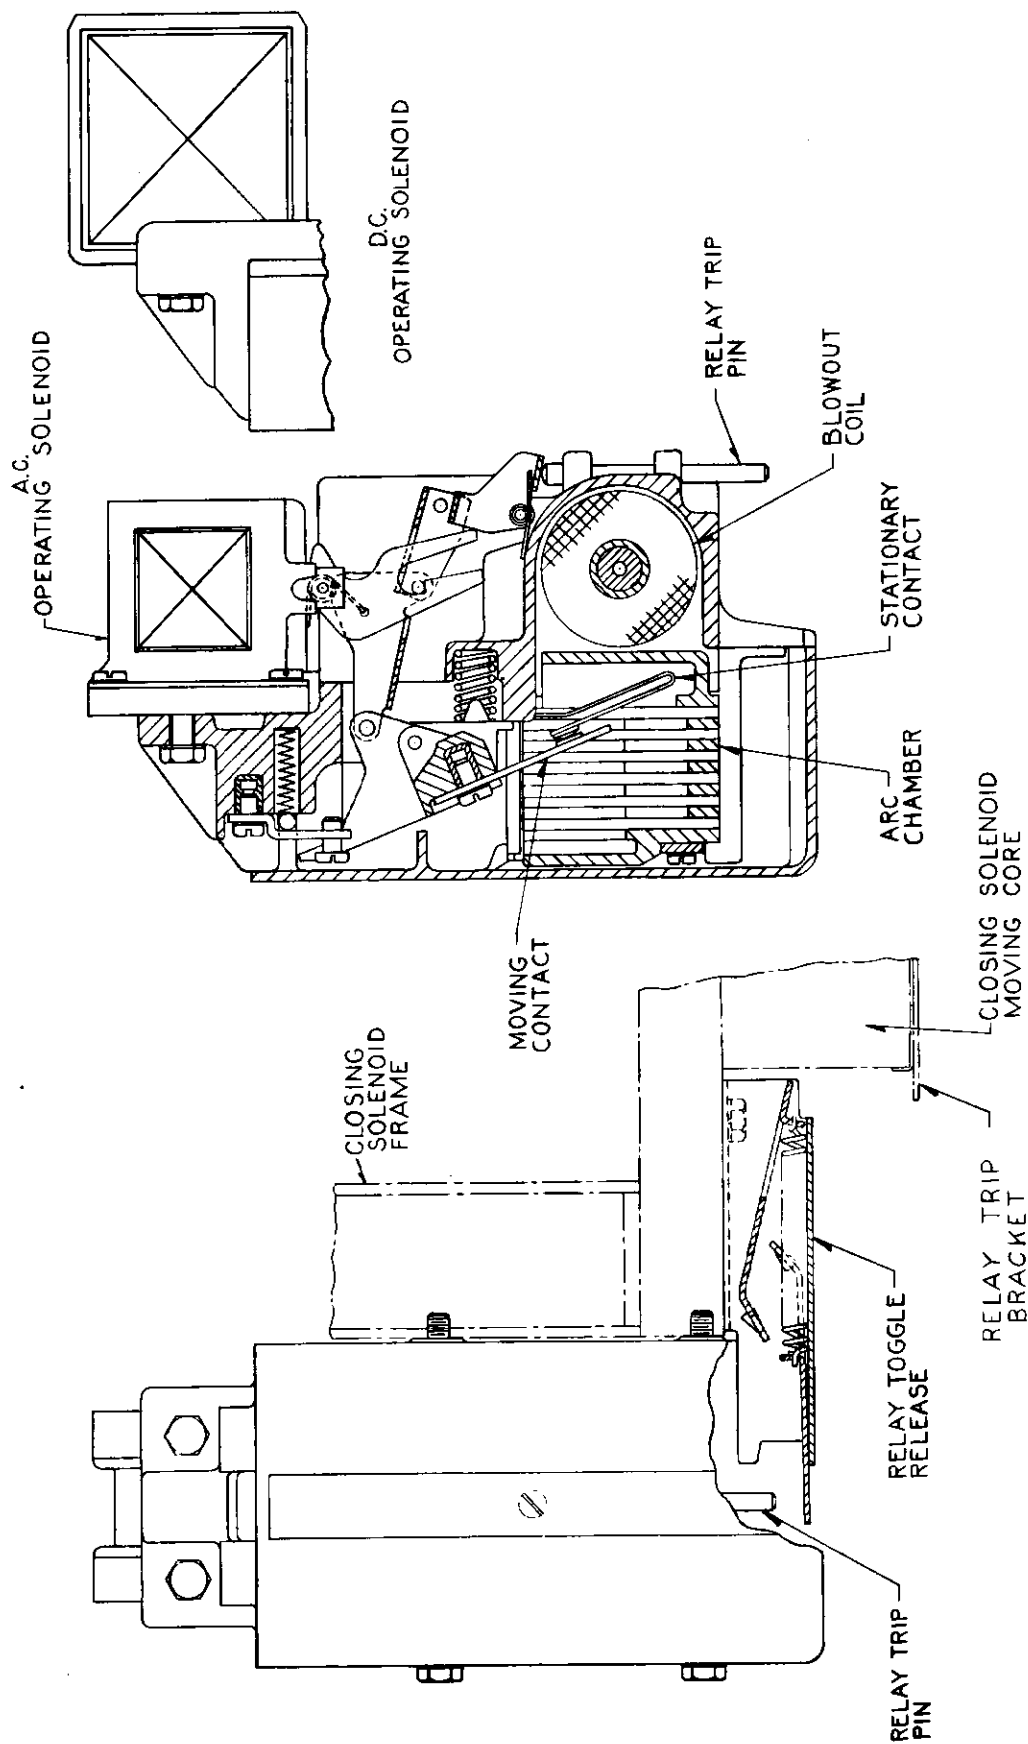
CONTROL RELAY - CONSTRUCTION DETAILS
